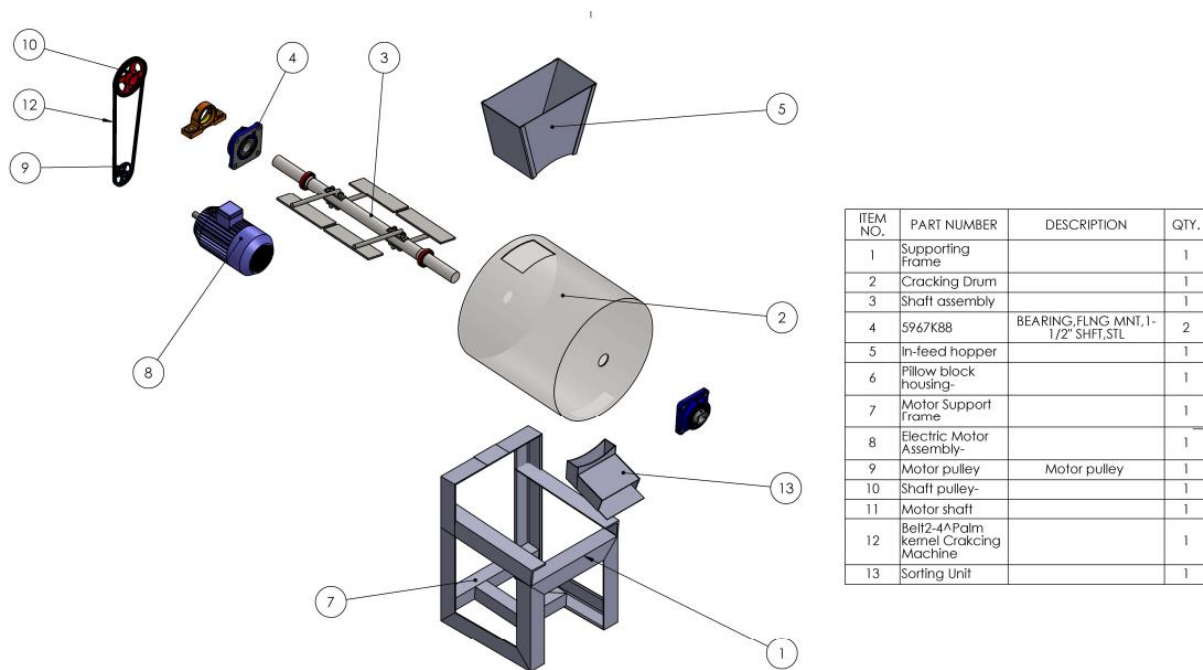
2 Exploded View and Bill of Materials of the Machine
